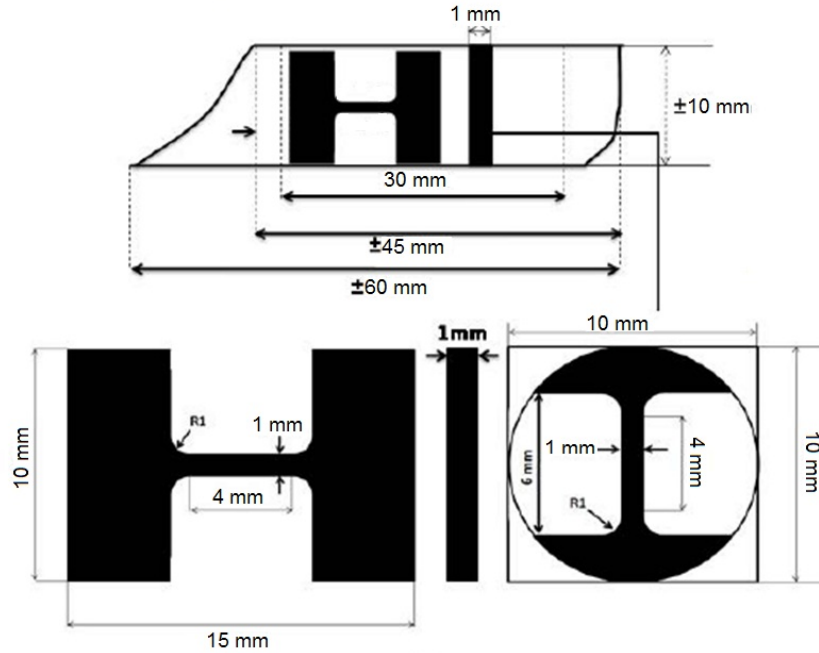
Schematic of specimens for micro-tensile test with its dimensions
